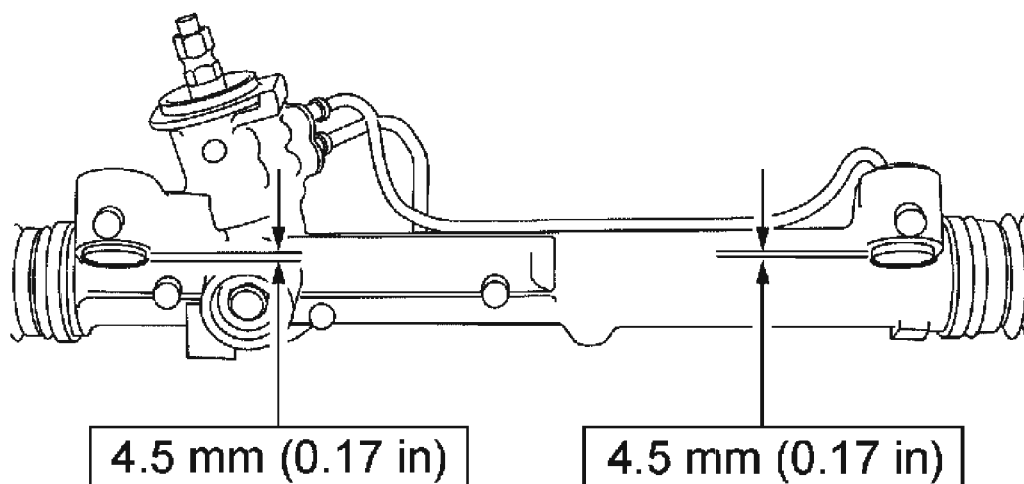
Installing Steering Gear Insulator Bushings Using Special Tools
